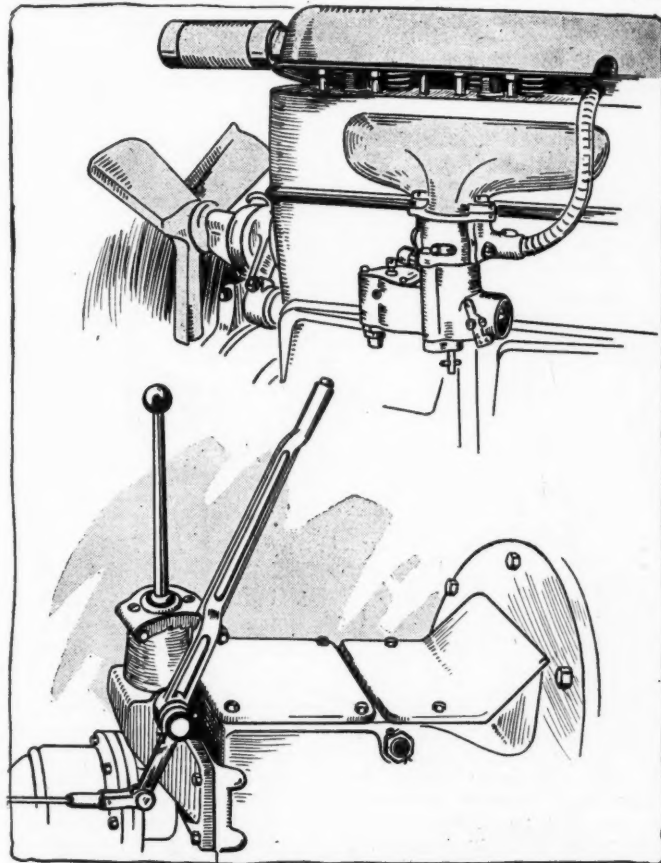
Upper—Left side of four-cylinder Oldsmobile block motor showing removable cylinder head, water jacketed intake manifold and aluminum fan. Lower—Gear box and mounting of levers
